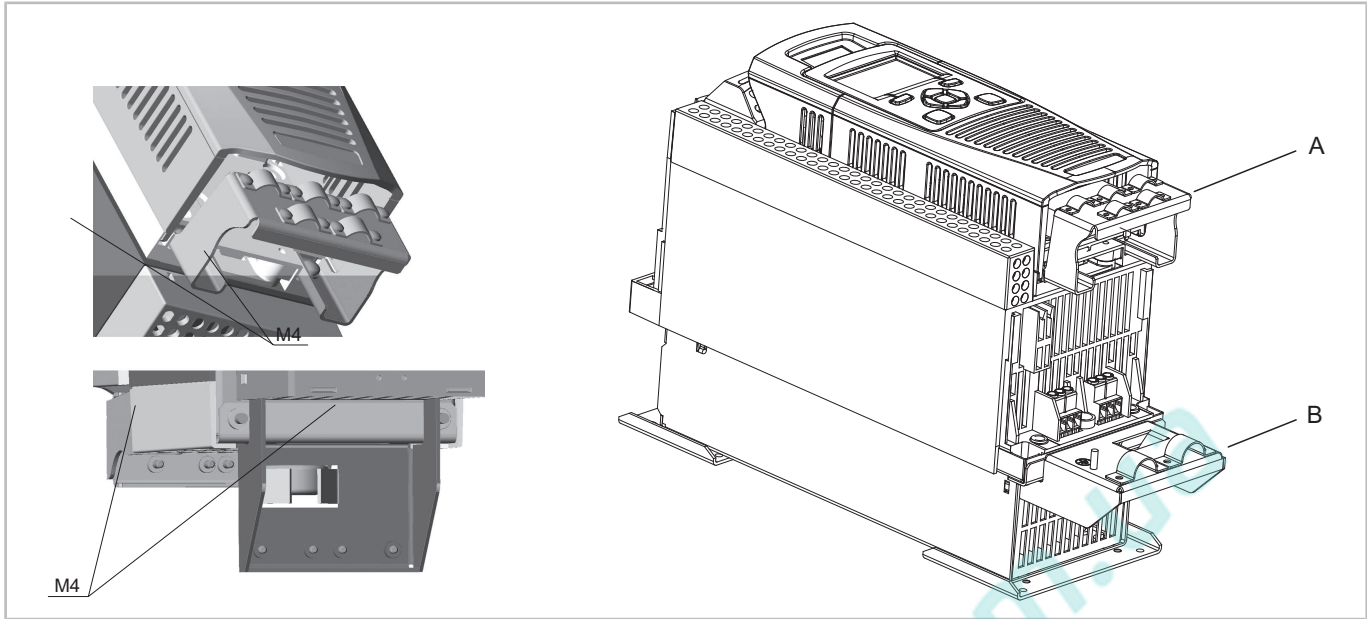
Mounting the fixtures for power connection cables and control cables using the example of FEU+16 for switch cabinet mounting
